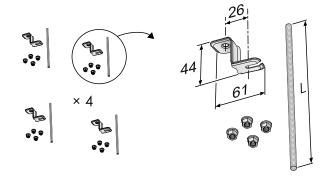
Assembly piece SYST MS M8-1, ceiling mount and threaded rod
